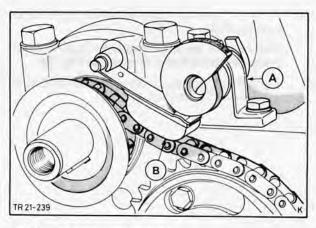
Chain tensioner installed A – Chain tensioner B – Tensioner arm
